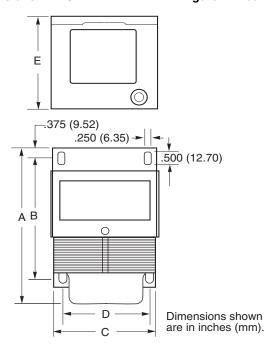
Mounting Dimensions AEM-8120 Series and AEM-8240 Series.
